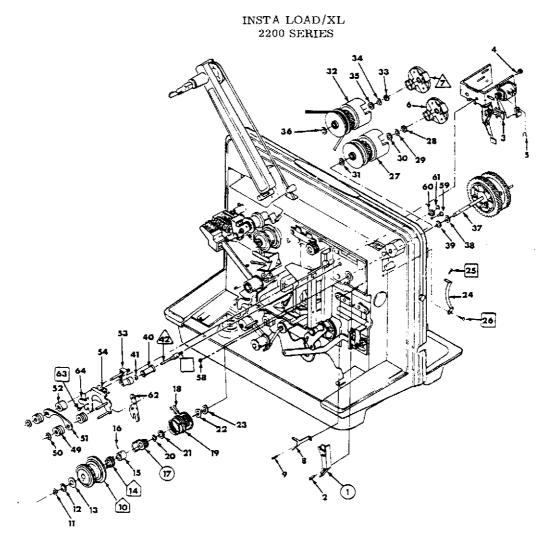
REMOVAL AND REASSEMBLY OF FRONT CLUTCHES
